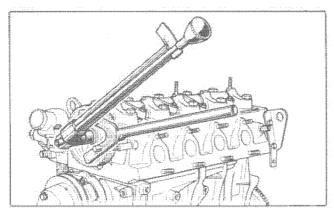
Using tool to undo/tighten cam sprocket bolt
